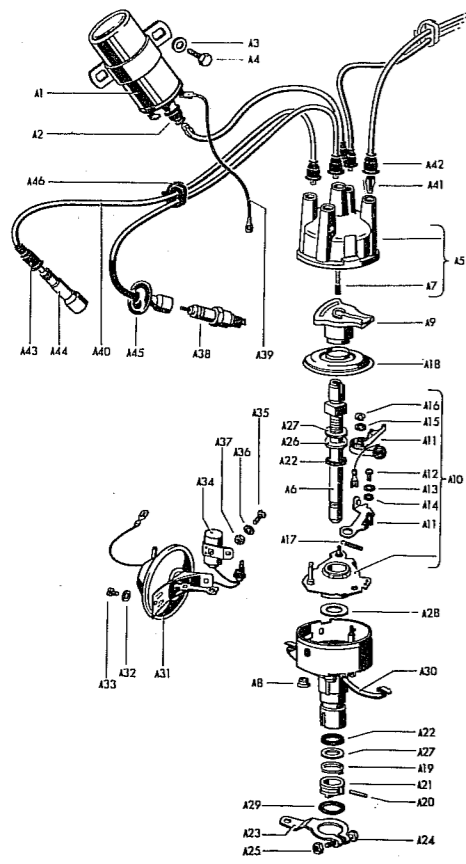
Exploded view of the various types of distributors fitted to Beetle models.
